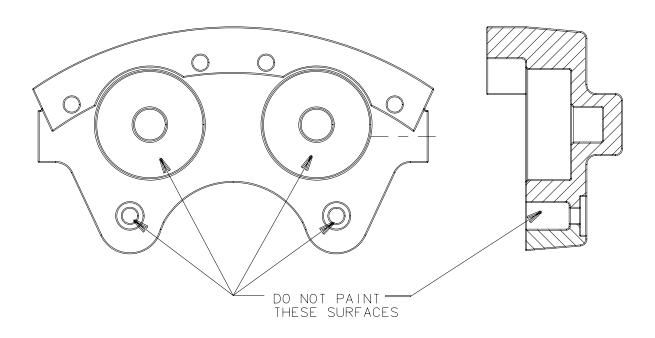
Typical Brake Cylinder, Painted Surfaces
